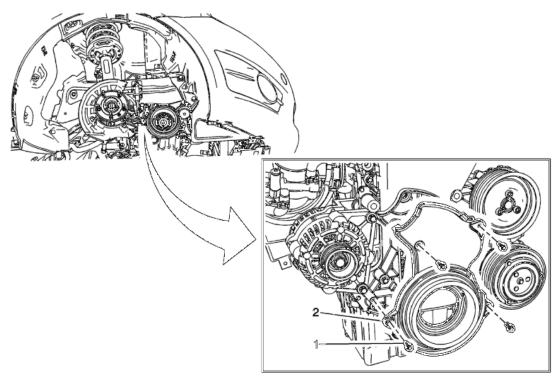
Timing Belt Lower Front Cover And Fasteners Courtesy of GENERAL MOTORS COMPANY
